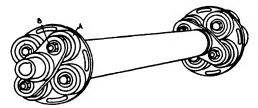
The Layrub Universal Coupling for Automobile Propeller Shaft
